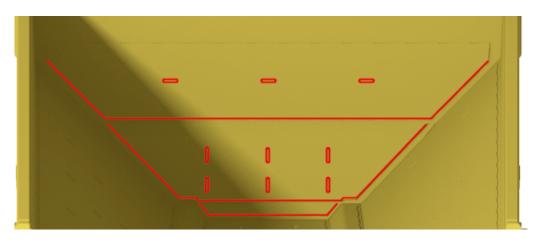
Wear plate weldments not fully reachable in PA or PB, given the possible workpiece positioner solutions.
